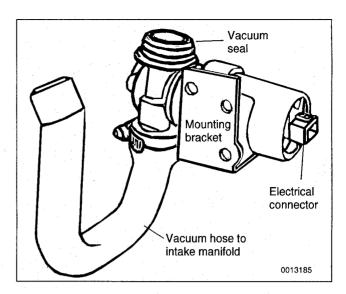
M52 engine: Idle speed control valve (located under intake manifold).
